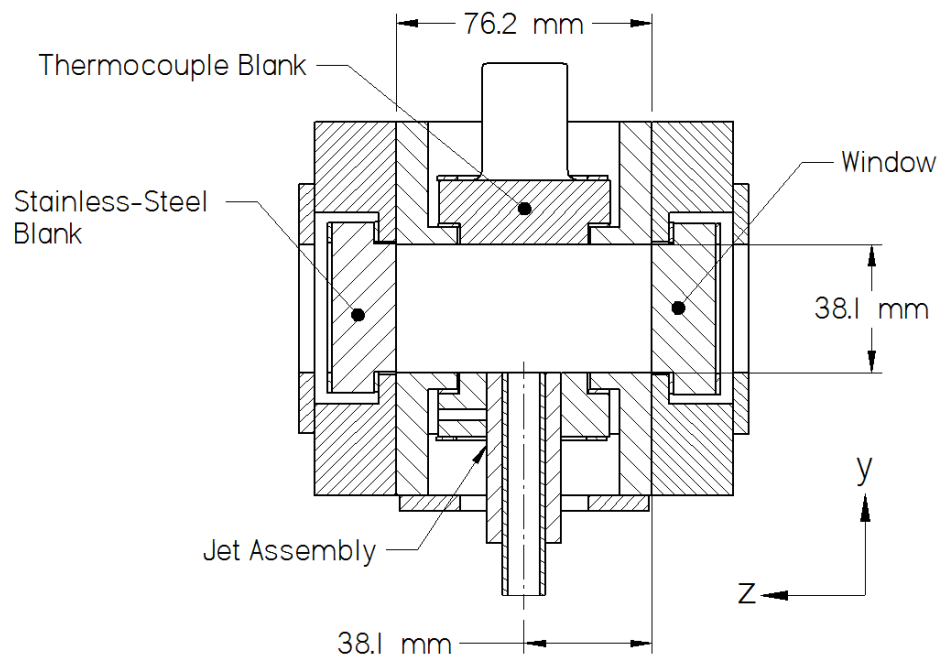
2D CAD drawing of experimental test rig. View shown with flush pipe jet assembly.
